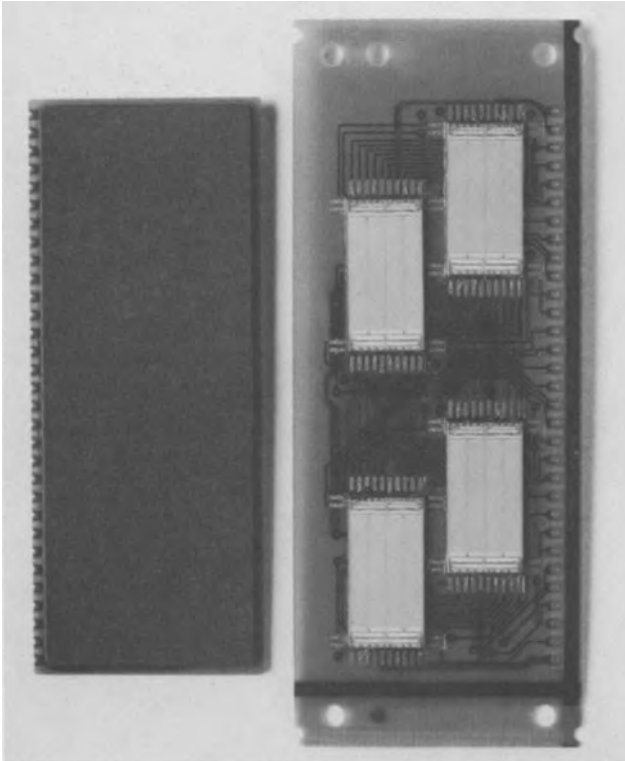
Overmolded SRAM module: Use of two-sided board, SIMM-type I/O format of a row of pads on one edge for use with surface attachment, low profile molding. (Courtesy of Citizen, Inc.)
